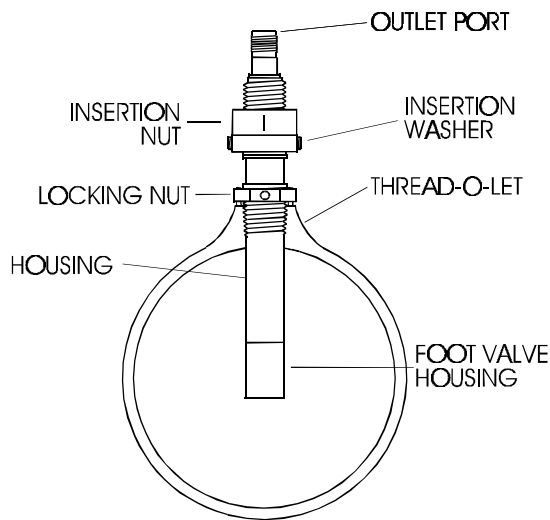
INSTALLED HOUSING & MEMBRANE PROBE
